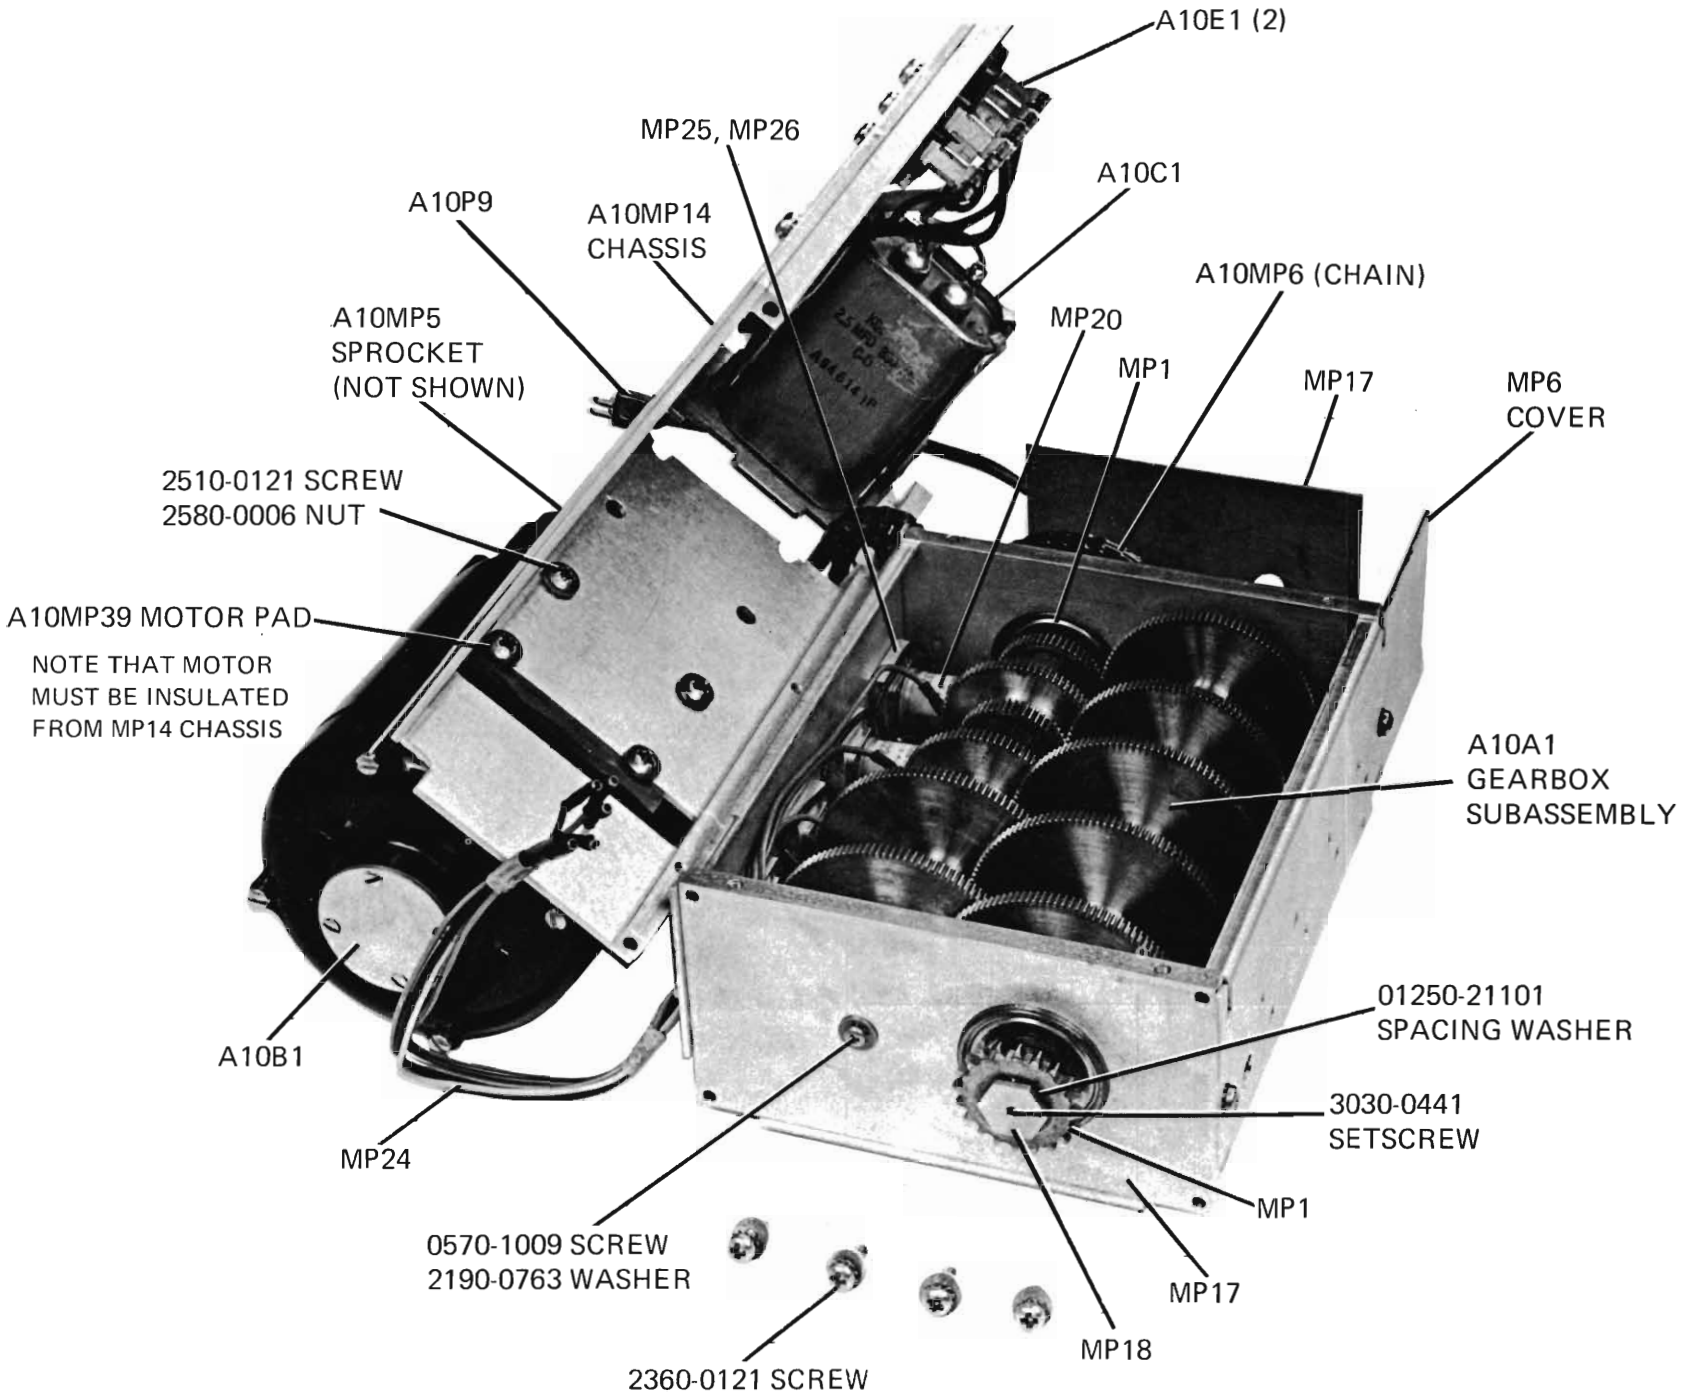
Drive Unit A10 (07754-60250) Subassemblies, Parts Location Diagram
